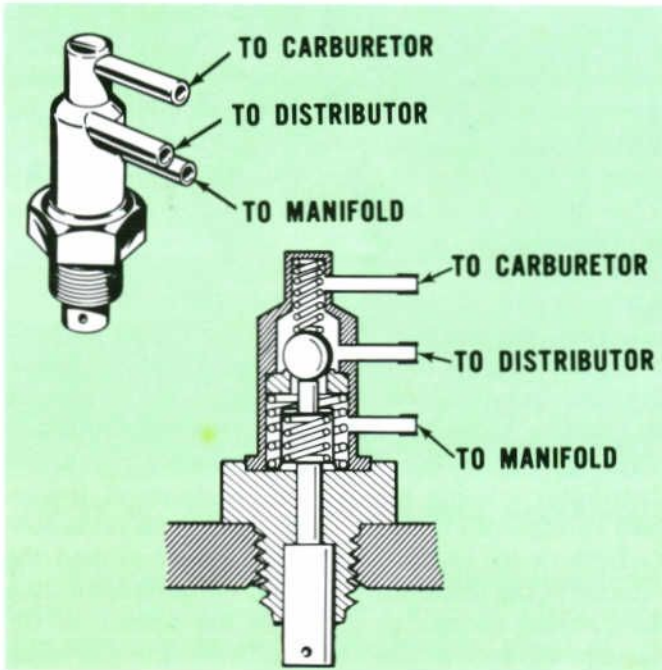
DISTRIBUTOR VACUUM CONTROL VALVE
